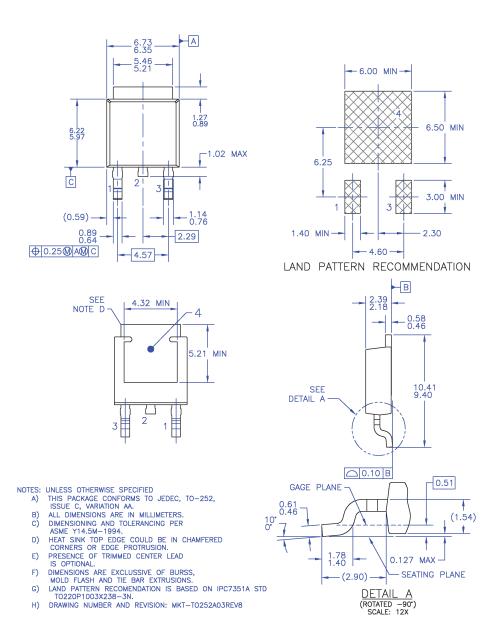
TO252 (D-PAK), Molded, 3 Lead, Option AA&AB
